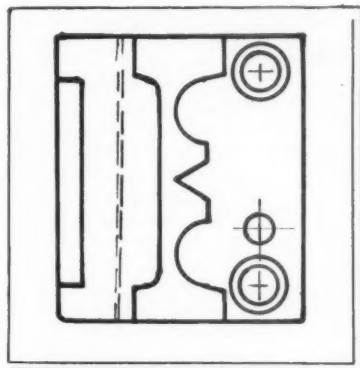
Plan view of the two-part punch showing how both are fitted together
